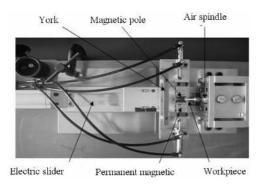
Photograph showing the magnetic abrasive finishing process apparatus.
